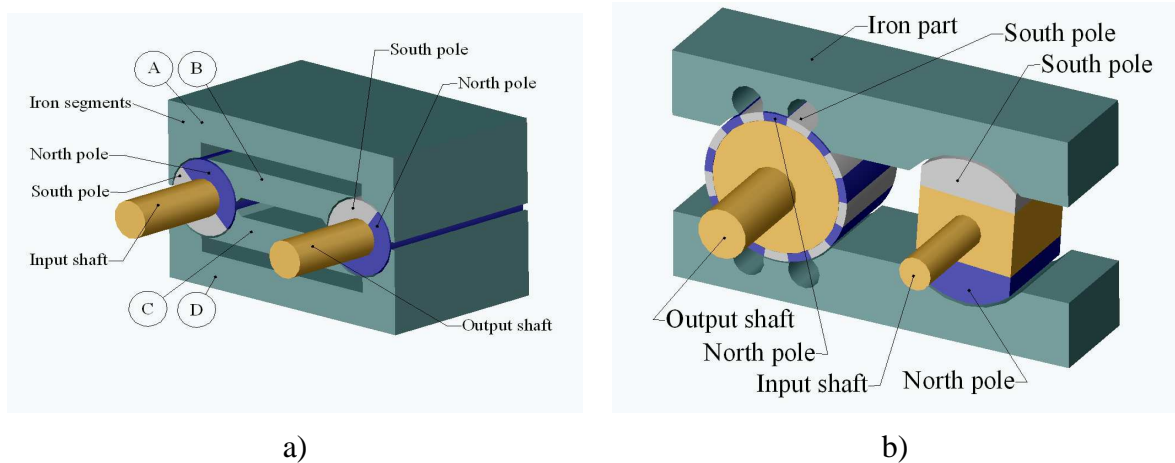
a) Flux guided magnetic gear with a gearing relationship of 1:1 [35]. b) Flux guided magnetic gear with a gearing relationship of $1:n_p$, $n_p=9$ [36].
